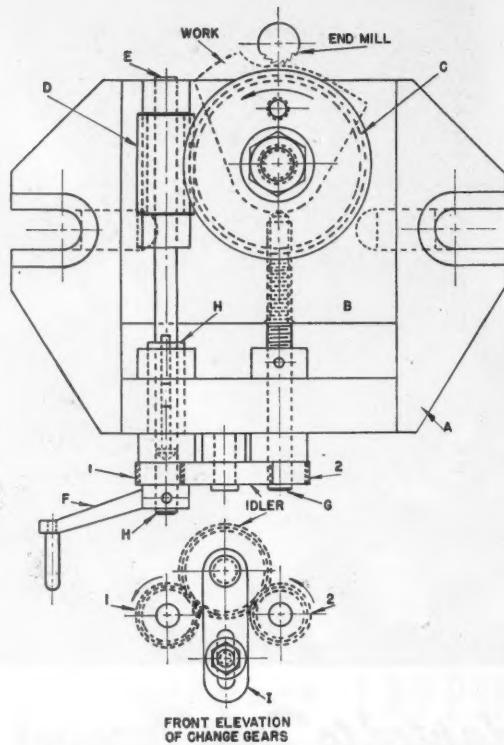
Drawing of proposed Semi-Universal Fixture for milling the edges of cam lobes. Carriage B is guided in a dovetail slide (not shown)
